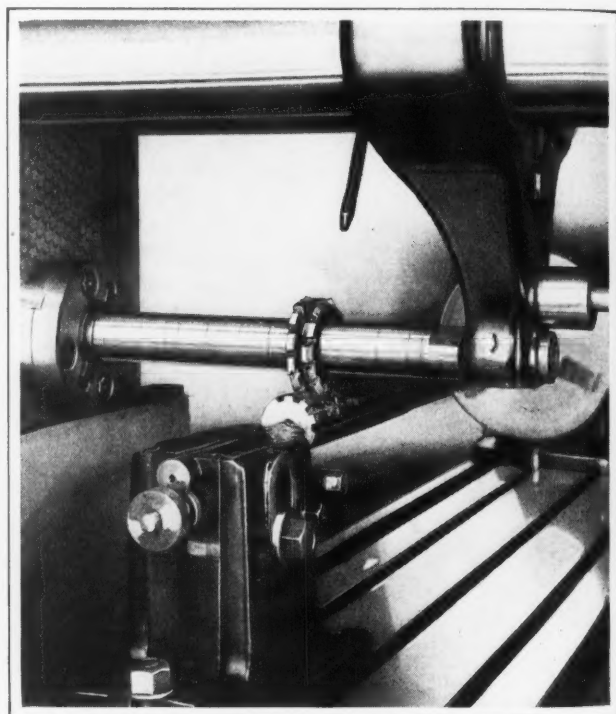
Formed Cutters Designed for Simultaneously Milling Two Grooves in Splined Shafts
